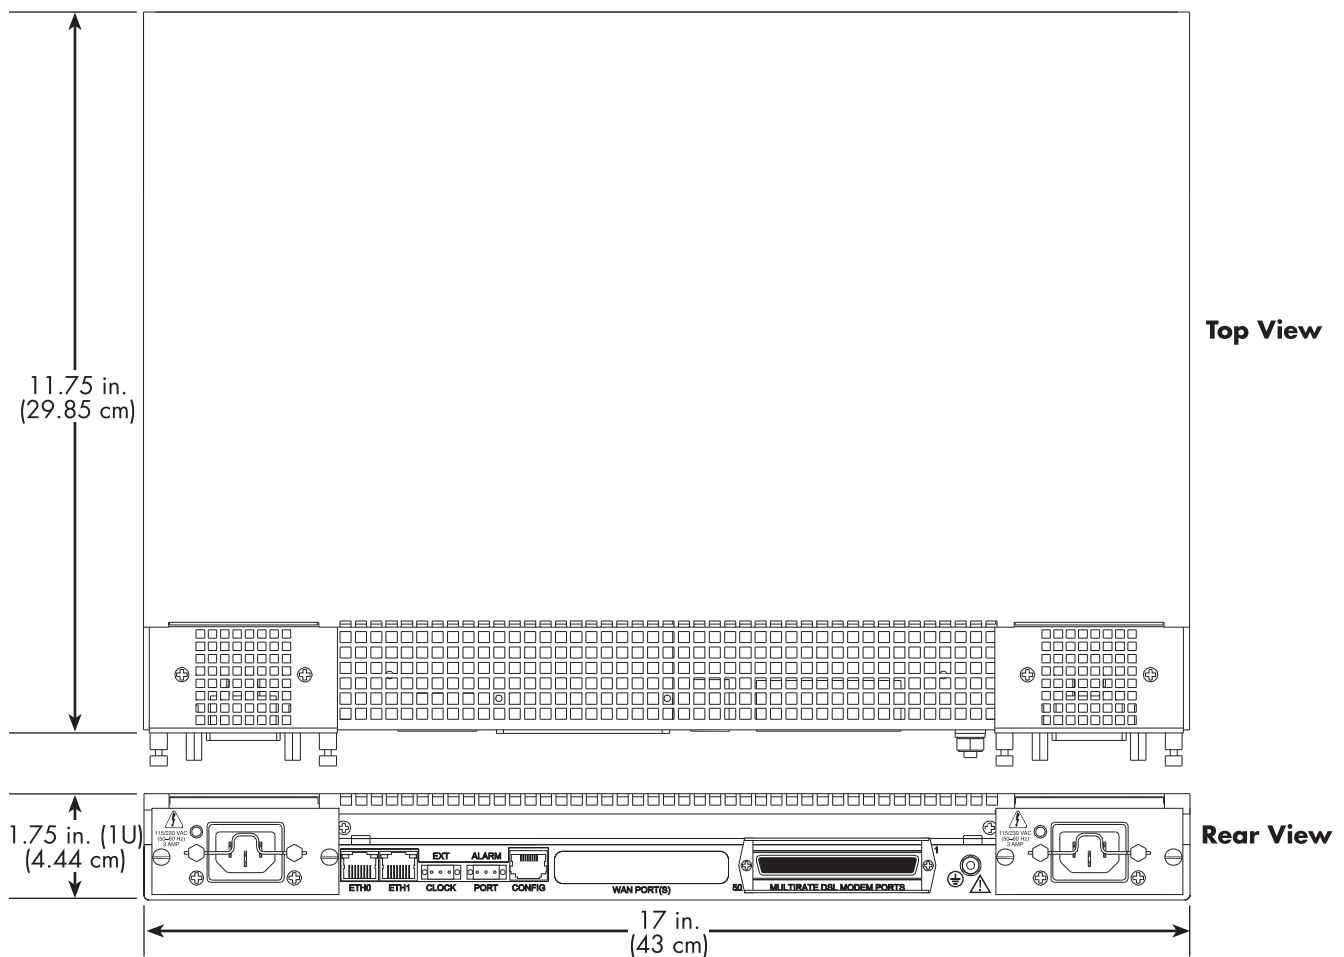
Model 3224 IpDSLAM chassis physical dimensions
